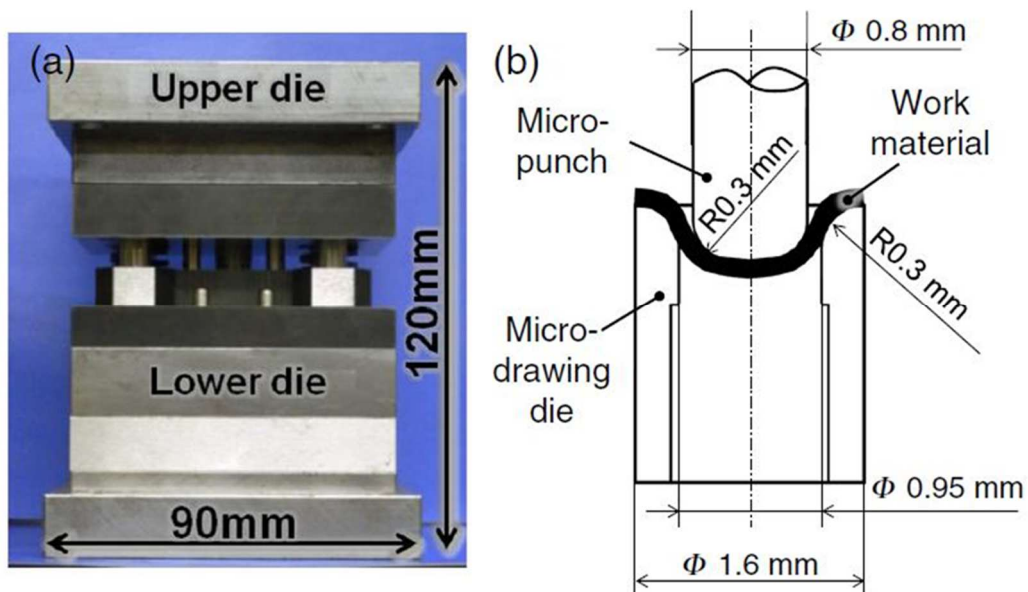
Micro-deep drawing die assembly: (a) appearance of die assembly, (b) dimension of die and punch.
